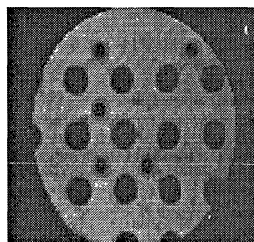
X-ray Micrograph of a Mounted PBGA Showing Solder Splattering/Balling
